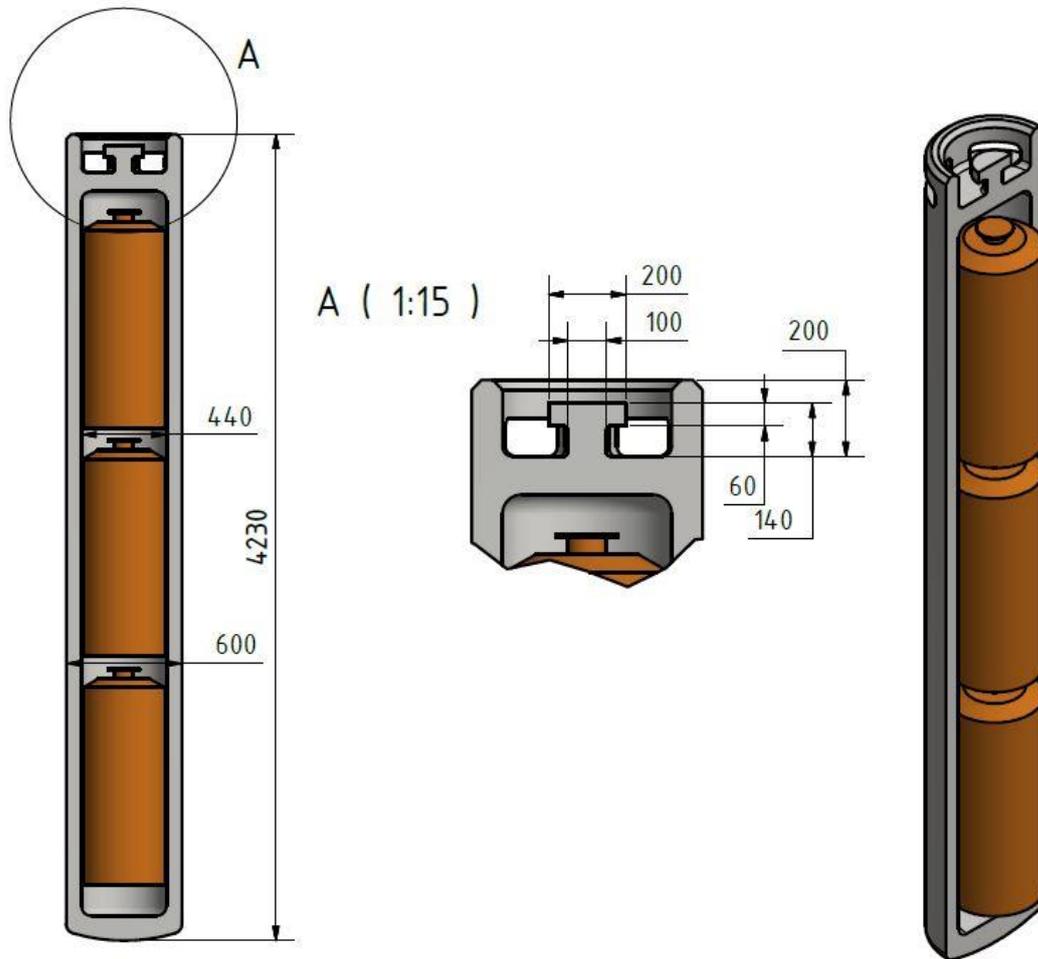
Half cut of the canister loaded with three CSD-V casks and including dimensions.
